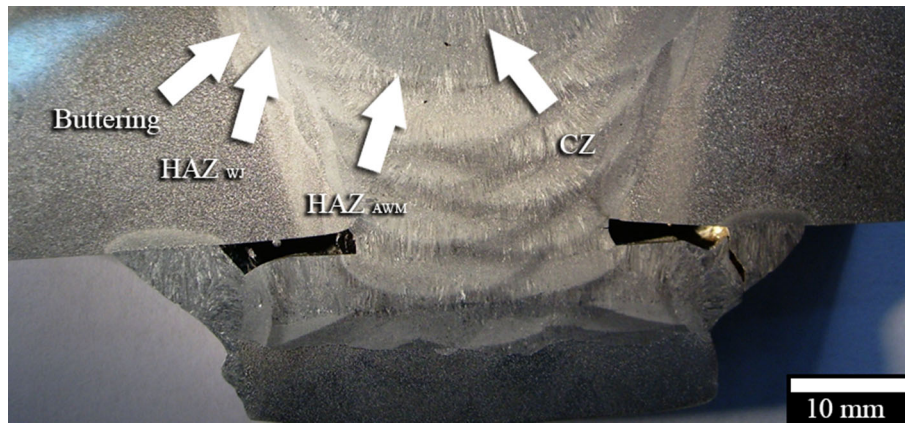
Photomicrograph of the multipass all-weld metal coupon (Vilella reagent). CZ—Columnar zone; HAZ_{AWM}—Heat-affected zone all-weld metal; HAZ_{wj}—Heat-affected zone welding joint
